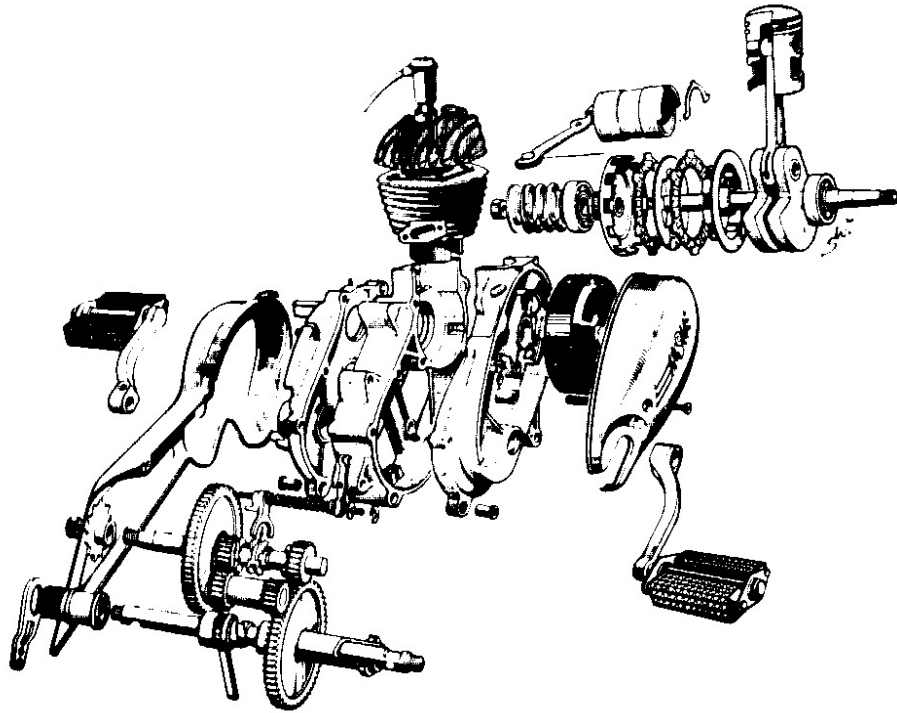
DETAIL VIEW OF THE ENGINE UNIT, EXPLODED
